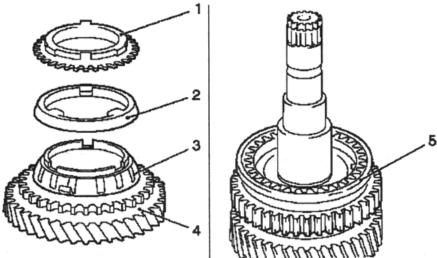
Setting dentate Wheel 2 - j transfer on main Shaft:
